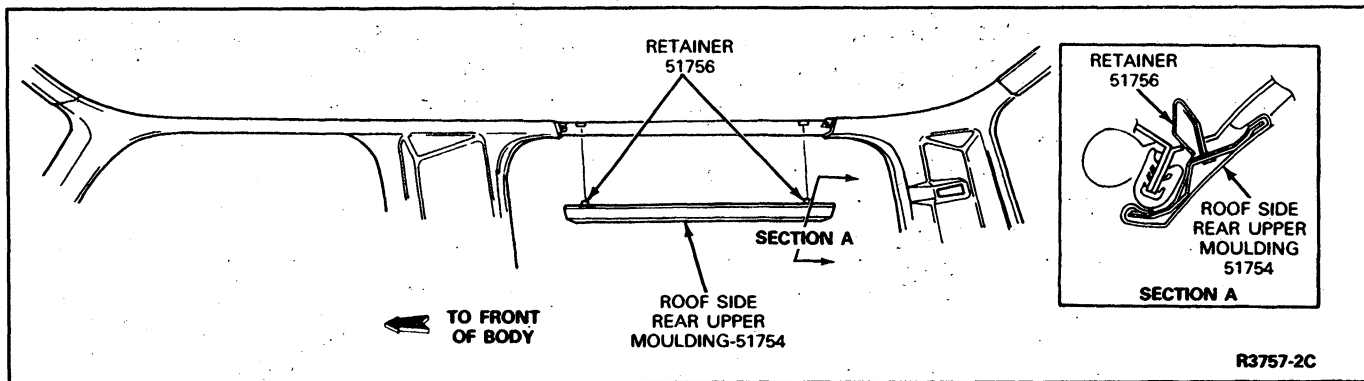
Roof Side Moulding—F-350 Crew Cab
